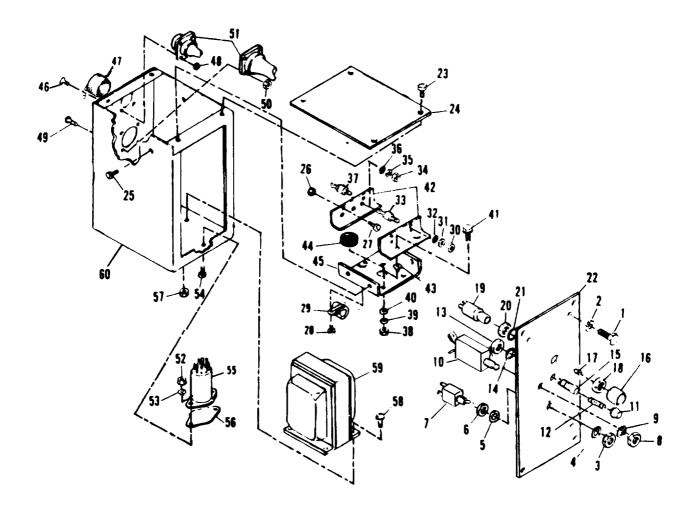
Electric Winterization Kit Heater Control Assembly, Exploded View (Sheet 1 of 2)
